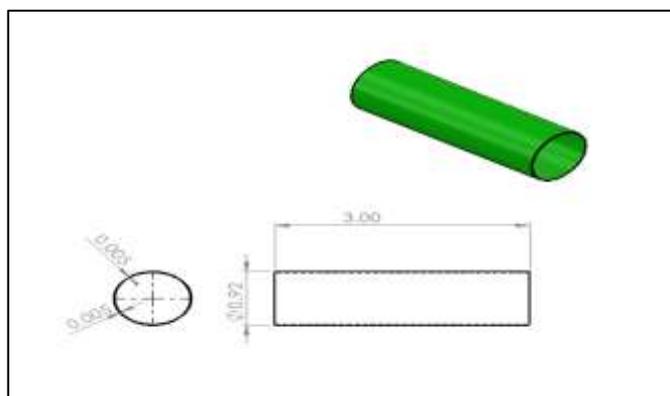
Petroleum Pipeline Drawing Without Composite Coating.
